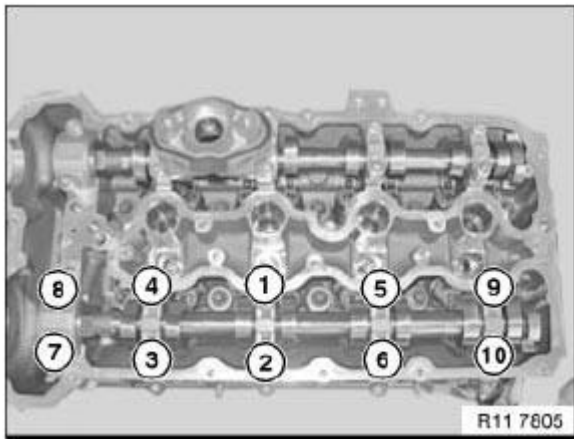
Identifying Camshaft Bearings Bolts Tightening Sequence
